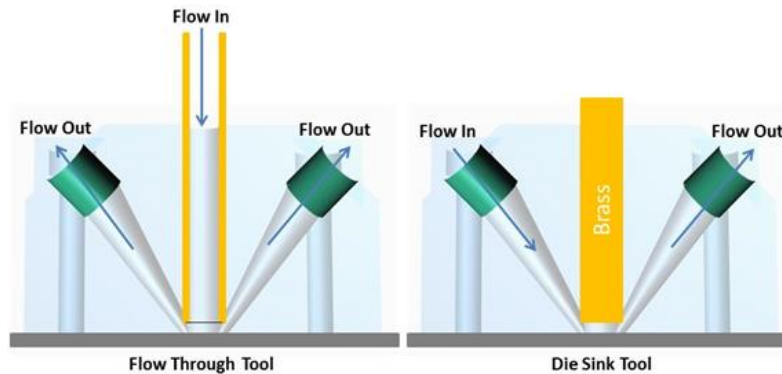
3-D CAD drawings of the flow assembly with tube (flow-through, left) and rod (cross-flow, right) tools indicated.
